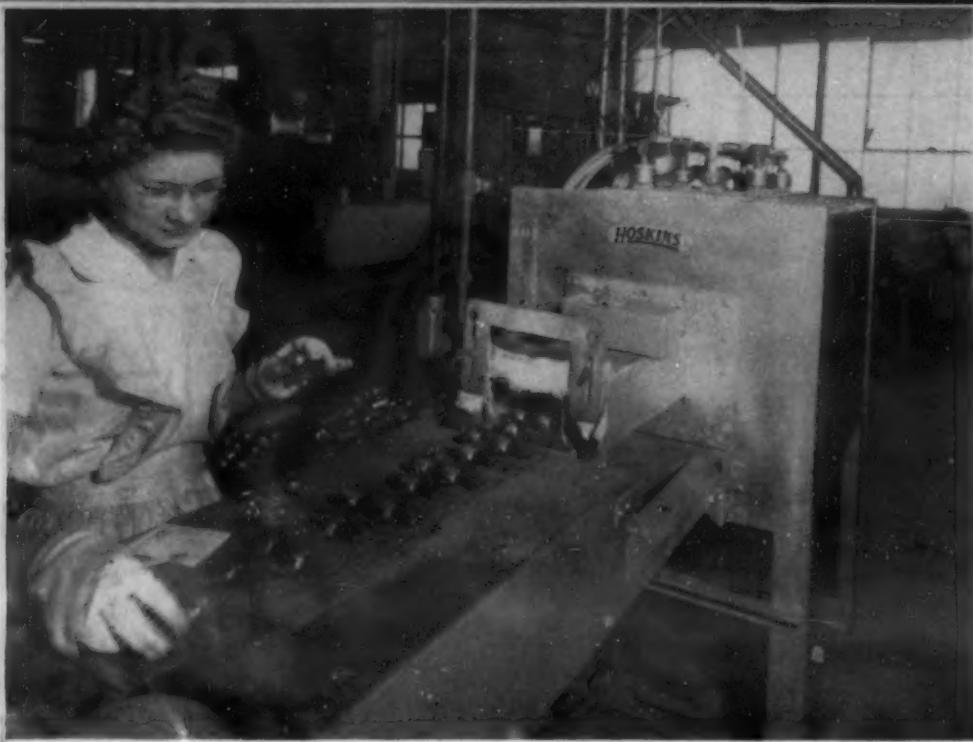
Brazing a Monel metal dehydrator with "Easy-Flo."
